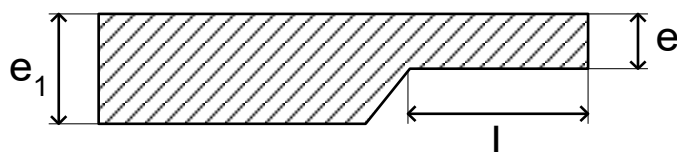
cross section of the pipe wall at the side of the butt weld.
